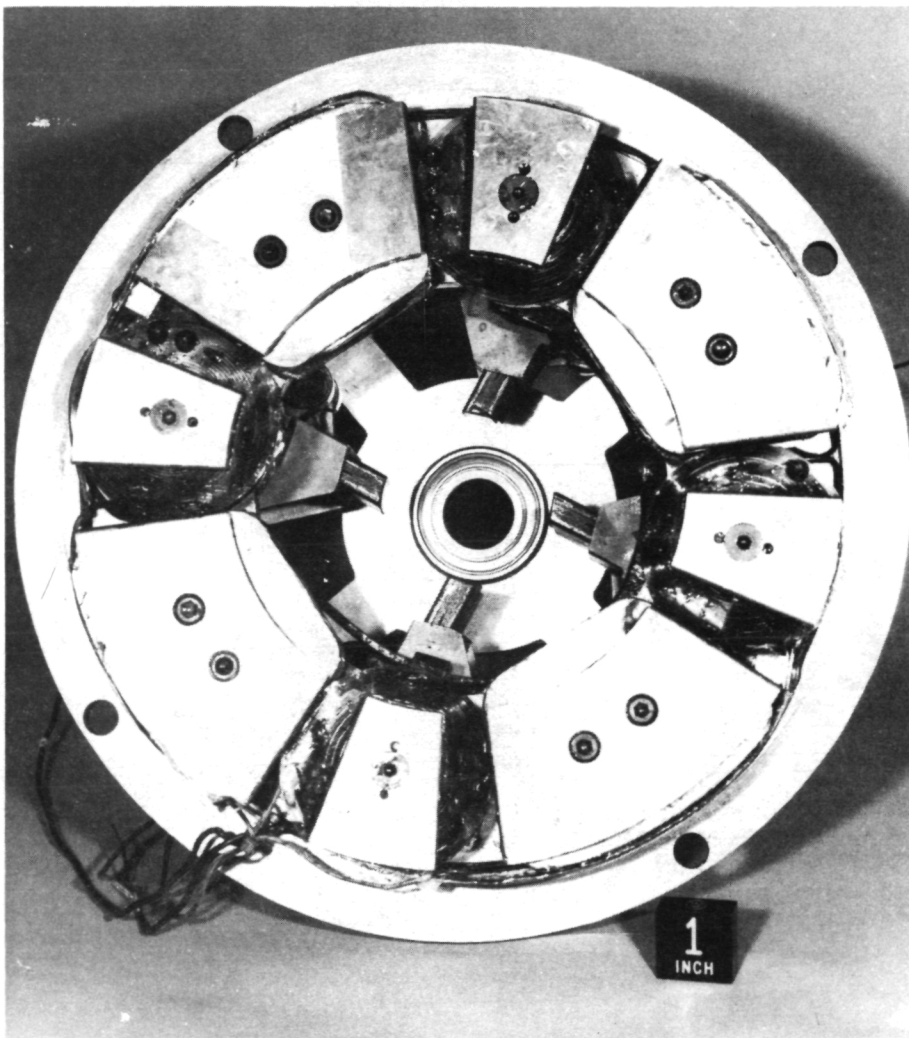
Engineering Model Stator Assembly - Commutator Side
